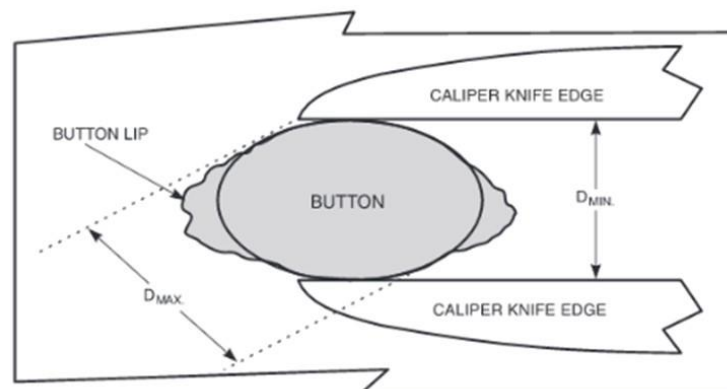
Example of how to measure the weld button size post destructive testing (AWS Standards, 2007)
